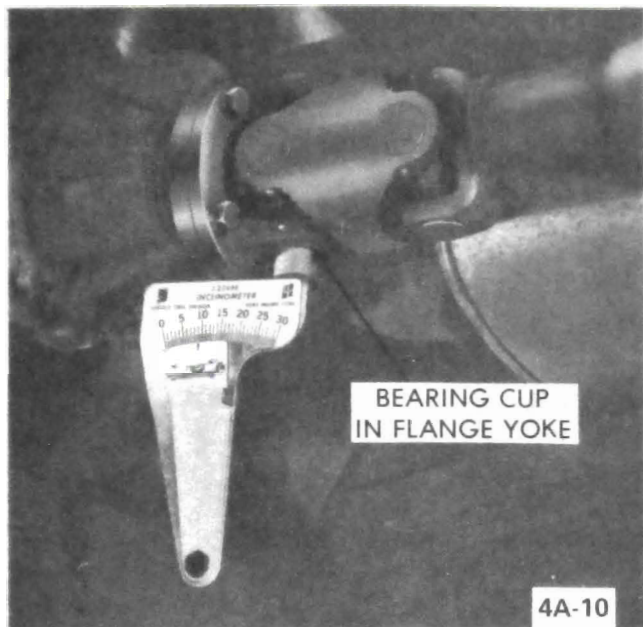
A-10 - Measuring Angle at Rear of Propeller Shaft
